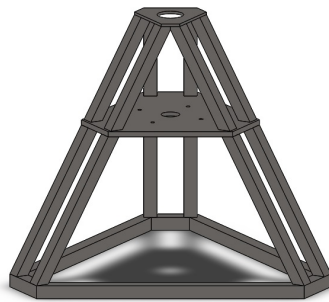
Displayed here is the CAD model for the motor stand assembly.
